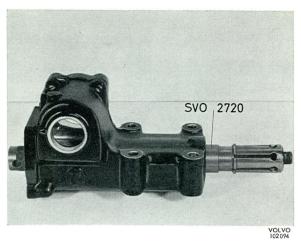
Removing the bushes, pitman arm shaft, I Puller inserted
